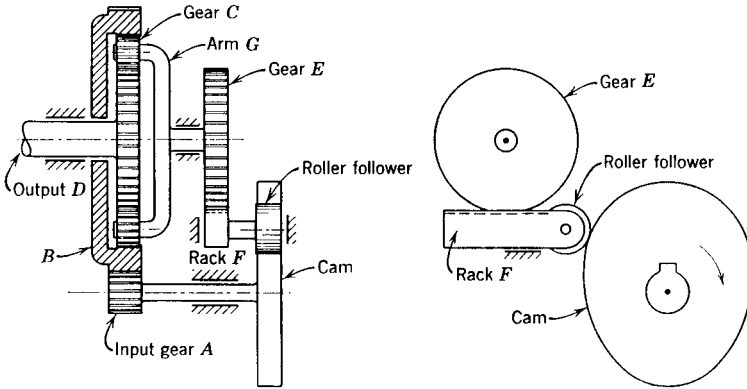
Cam-modulated mechanism—epicyclic gears and moving cam, type 2.
